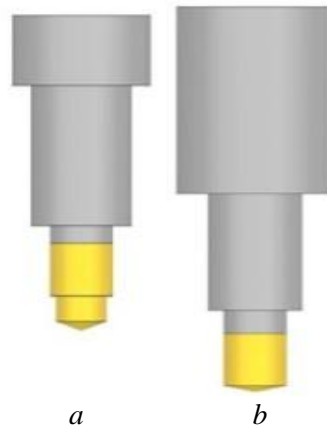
The images of a combination machining tool consisting of two cutting edges: a - The combined machining tool including a hole drill with diameter of $\Phi 9.5$ mm and a milling cutter with a cutting edge on the end face for machining stepped holes with diameter of $\Phi 14.5$ mm; b - The combined machining tool includes a hole drill with a diameter of $\Phi 14.5$ mm and a boring tool with a 45-degree inclined cutting edge for chamfering a hole diameter of $\Phi 20.5$ mm and a shaping boring bit with a diameter of $\Phi 20.5$ for machining a hole diameter of $\Phi 20.5$ mm.
